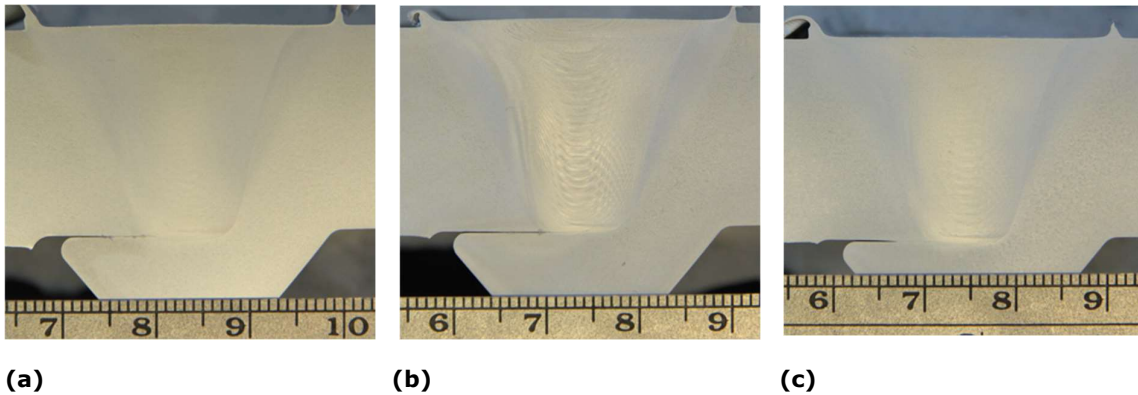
1_Gap_23mm weld macrography at (a) start, (b) middle, and (c) end
